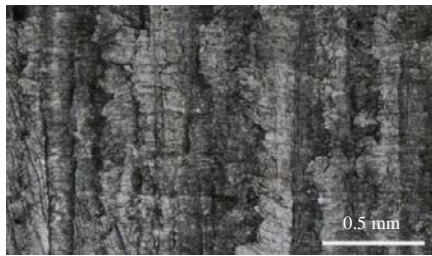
Workpiece surface after forming with T3wet ($v_f = 500$ mm/min).
